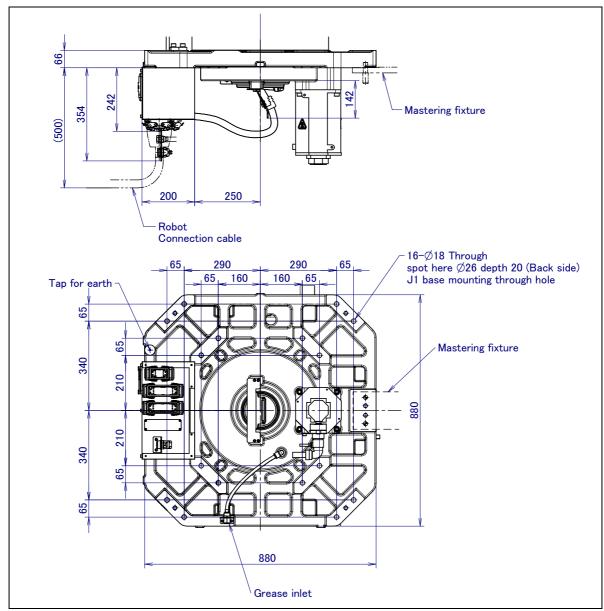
(e) Installation interface for the robot without a standard pedestal (Remote controller type)
